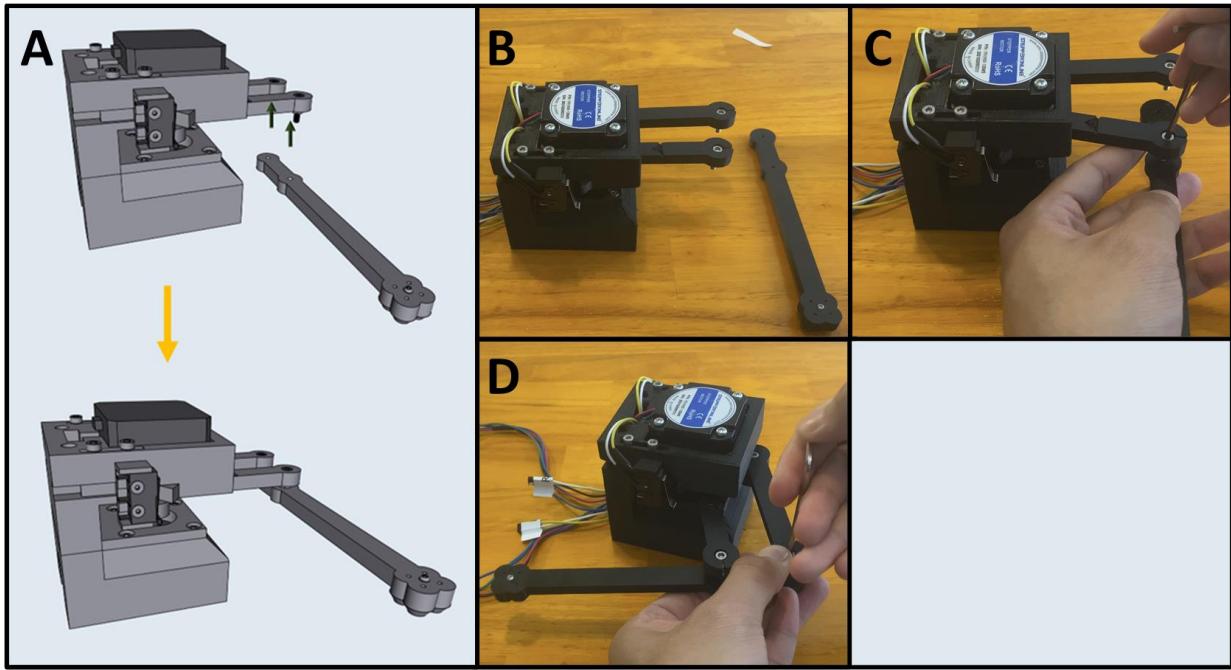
d: The procedure for attaching Arm Four to the motor assembly.
